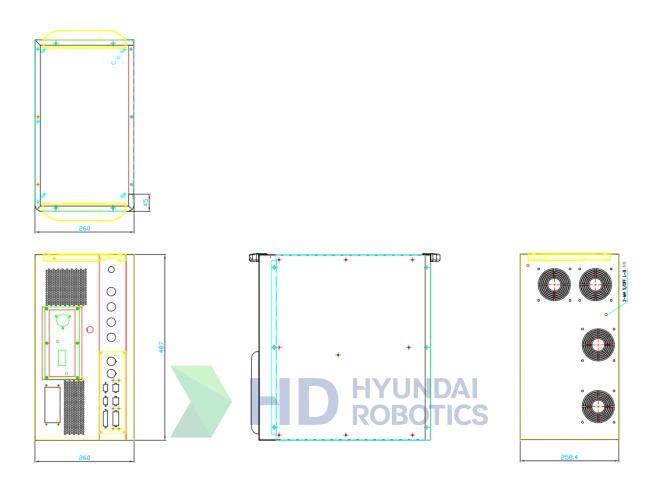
Dimension of Hi5a-T10 Controller (Unit: mm)
